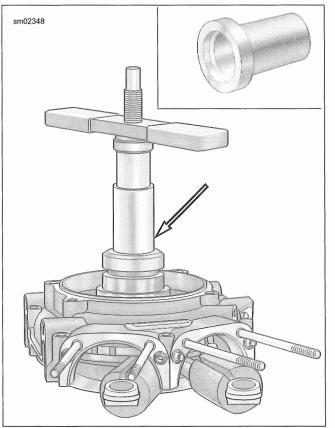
Sprocket Shaft Oil Seal Installer REPAIR RIGHT CRANKCASE HALF
